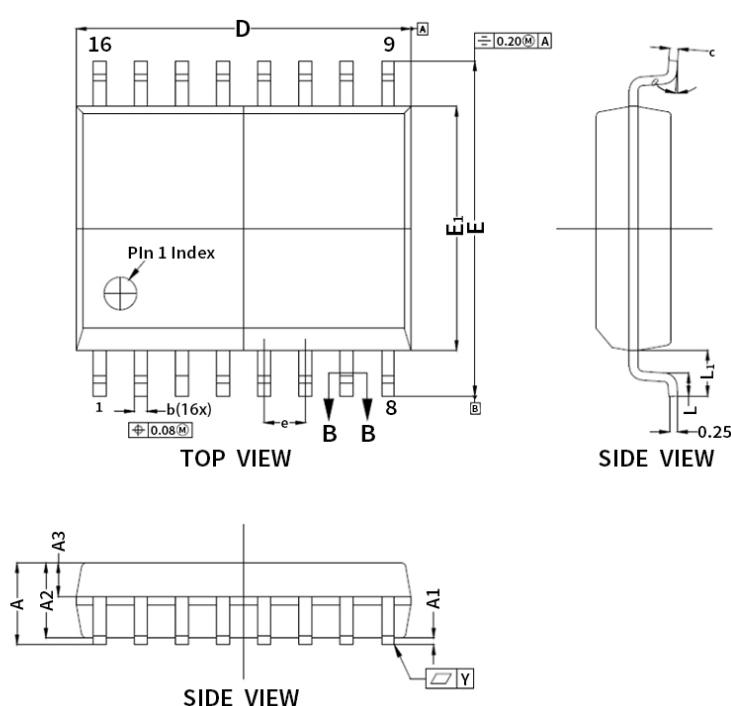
SOP16(300mil) Package Shape and Dimension in millimeters
